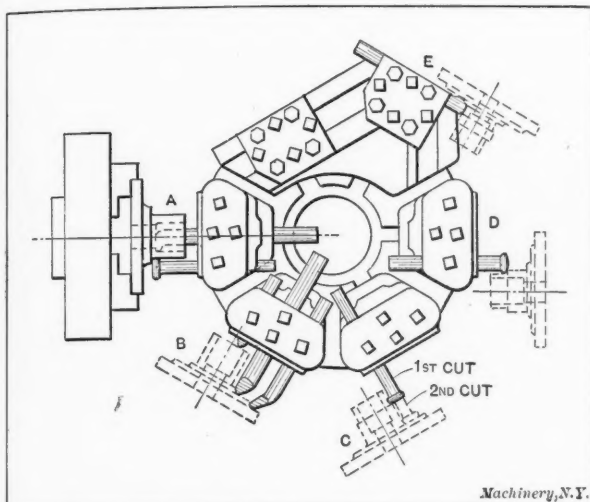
Lay-out of Tools on the Flat Turret Lathe for the Operation shown in Fig. 6
